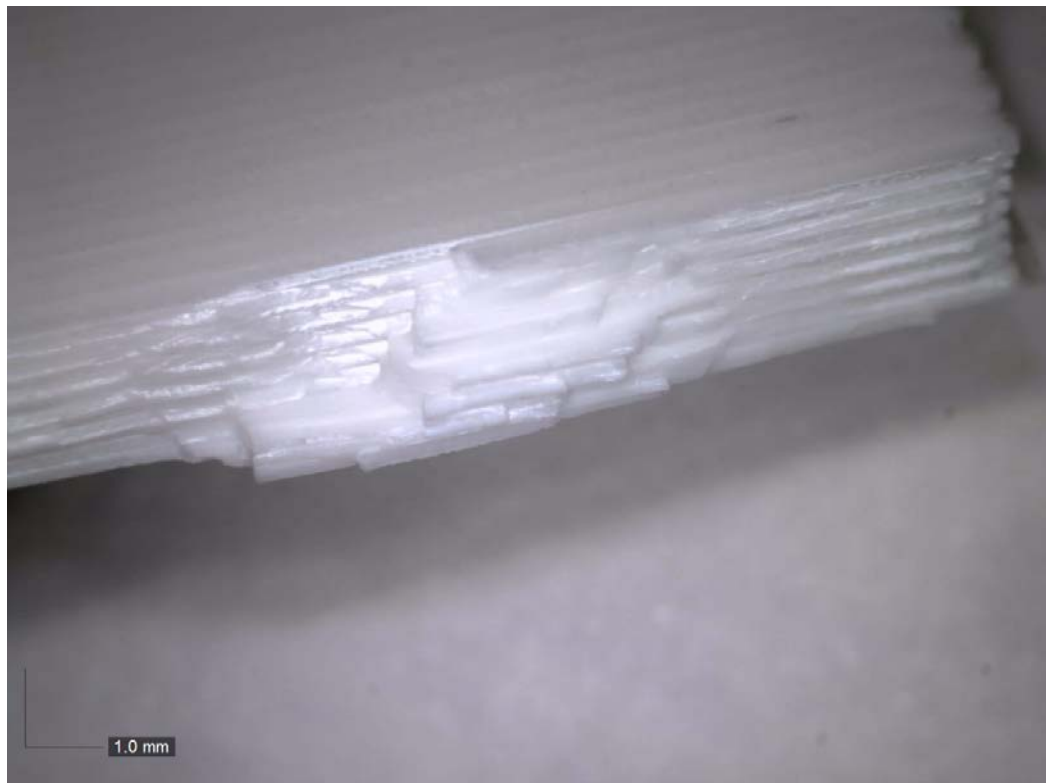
Fracture surface of A3 sample made of PLA without weave (side view)
